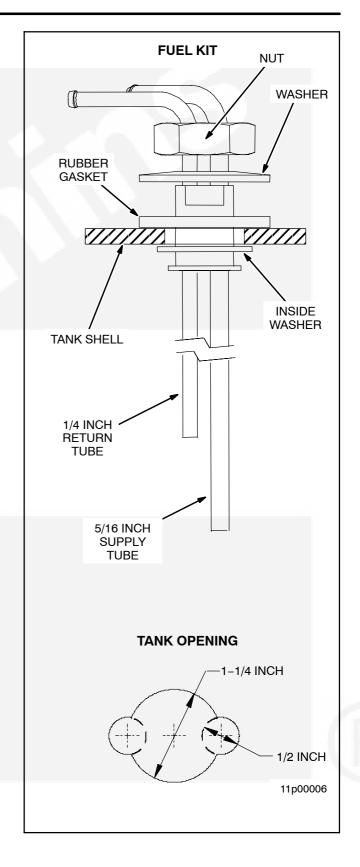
FUEL PICKUP TUBE ASSEMBLY
